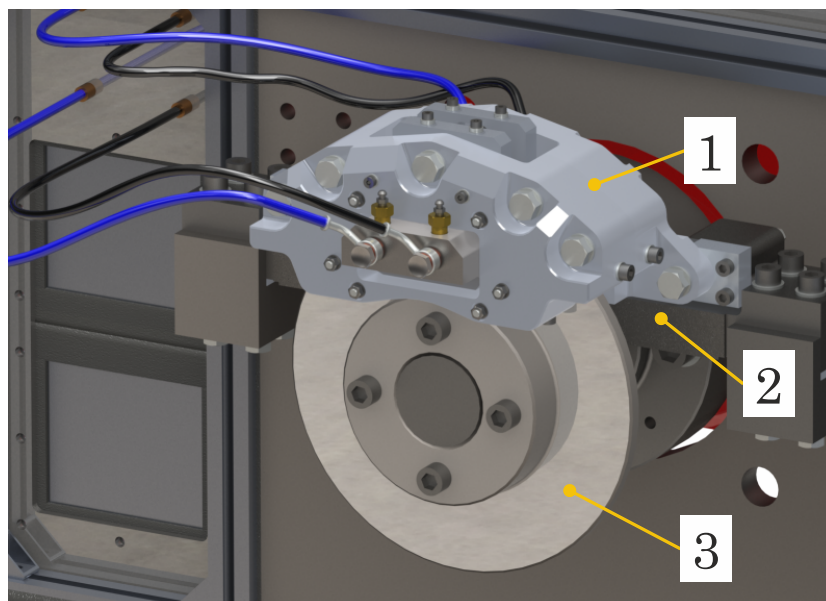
CAD model of a new brake assembly consisting of: 1) caliper assembly, 2) bracketry, 3) brake disc.
